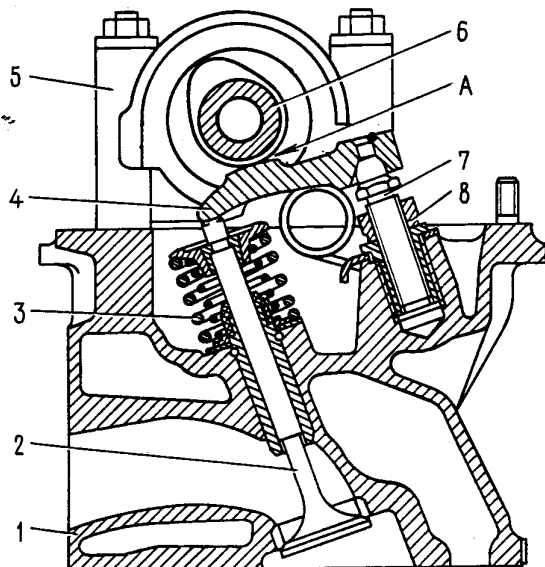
Cylinder Block and Head. Section Through Inlet Valve:
